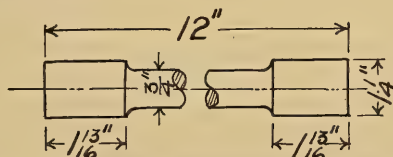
TORSION SPECIMEN FOR CAST ZINC.
